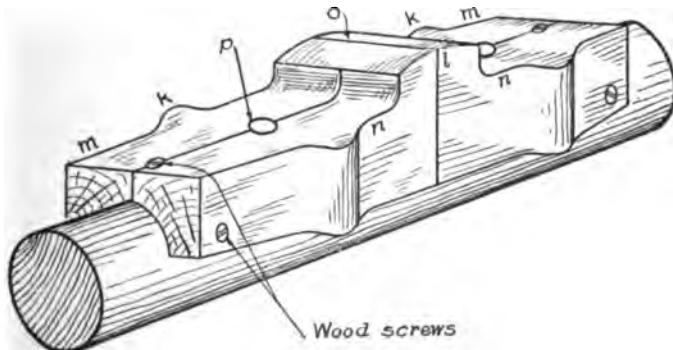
Cap Pattern Stock Mounted on Wood Arbor Ready to Turn Outside
